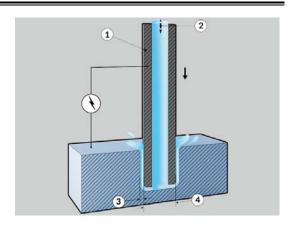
Electrical discharge machining (EDM for drilling holes) scheme
